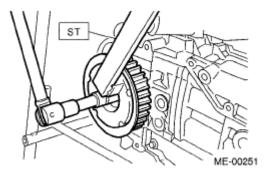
Installing Cam Sprocket Bolt Using Cam Sprocket Wrench ST (499207400) Courtesy of SUBARU OF AMERICA, INC.
